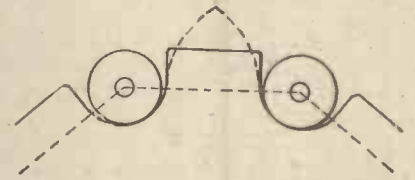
A bad form of tooth. Here the teeth will catch on the corner with a jerk, and this should be taken away.
